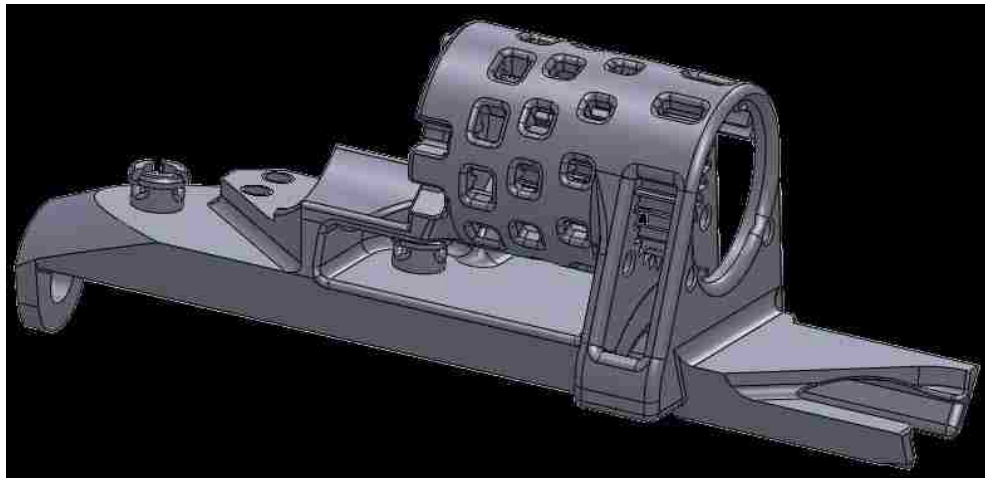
Rotary actuator mount section shown with 0.5 M epicyclic gear housing and three-pronged snap-together clips.
